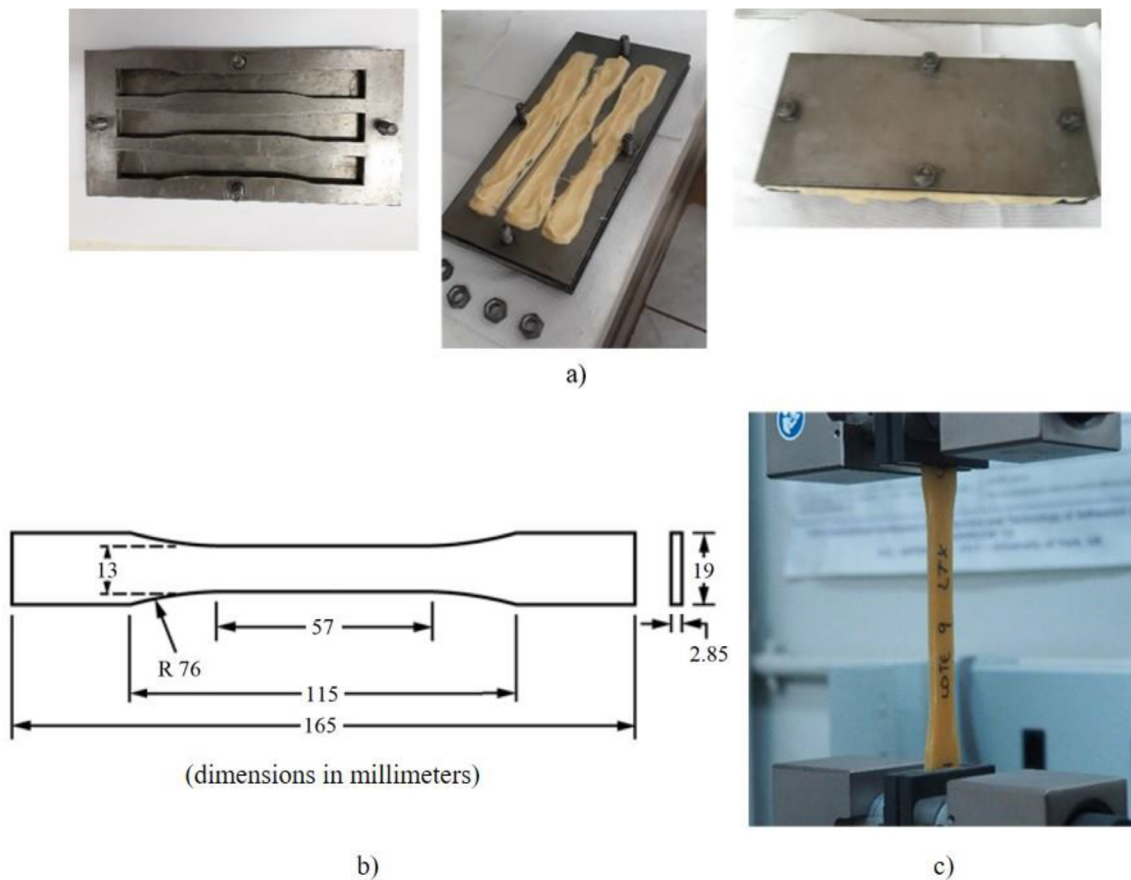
Tensile tests in bulk adhesives: (a) specimens manufacturing, (b) geometry (dimensions in millimeters) and (c) test set up.
